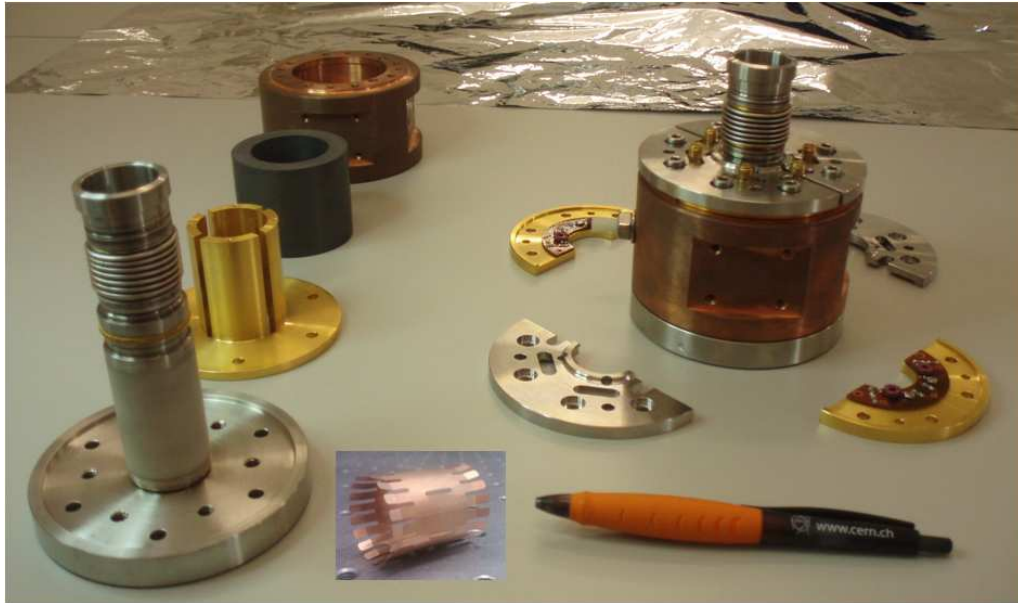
Picture of a disassembled BPS monitor showing its main parts, an assembled one is also shown (overimposed on the photo is included the RF finger). These units correspond to the two first constructed BPS prototypes, the BPS1 assembled (right) and the different parts of the BPS2 spread around.
